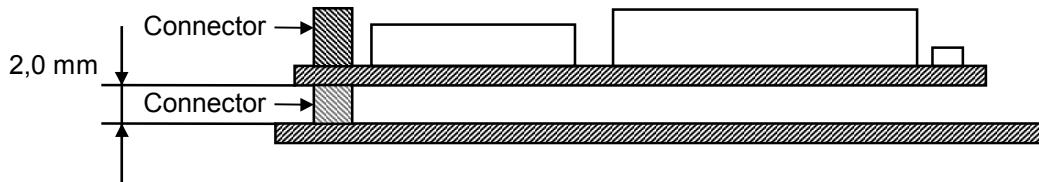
No components fitted on target PCB below HW 86022. Minimum distance between PCBs 2,0 mm
